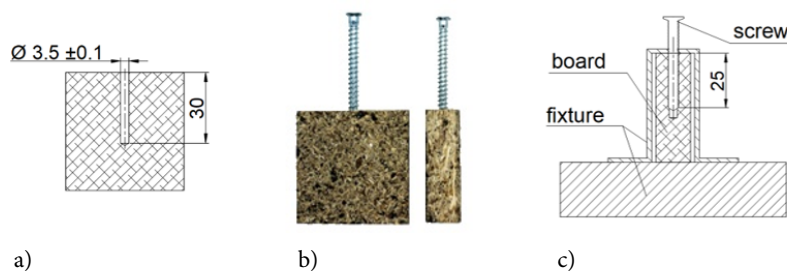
Method of preparing the specimen for force measurement when removing the screw from the edge of the board: (a) pre-drilled hole, (b) view of the screw inserted into the specimen, (c) method of fixing the specimen in the holder
